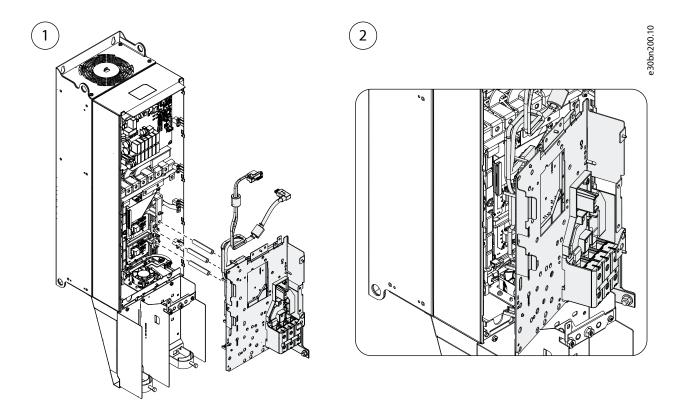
Reassembly of Bottom Upper Midplate Fx08
